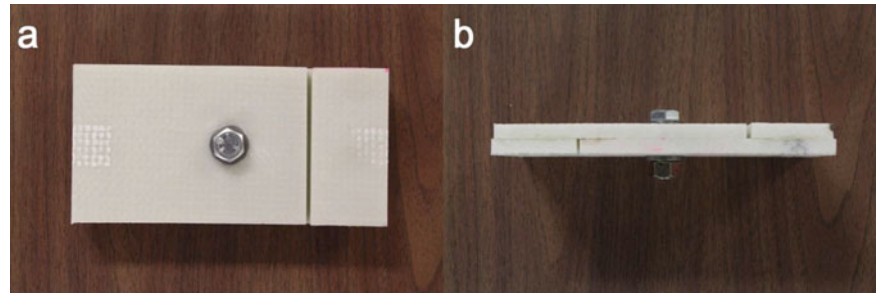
GFRP bolted joint assembly: (a) top view, (b) side view
